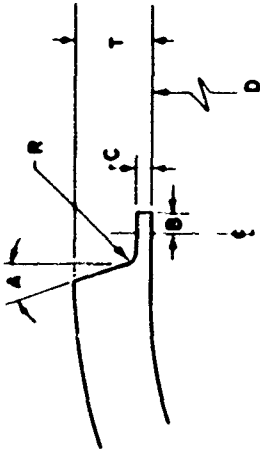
TYPICAL FUSION-WELD-JOINT DESIGNS (REF. 24)
